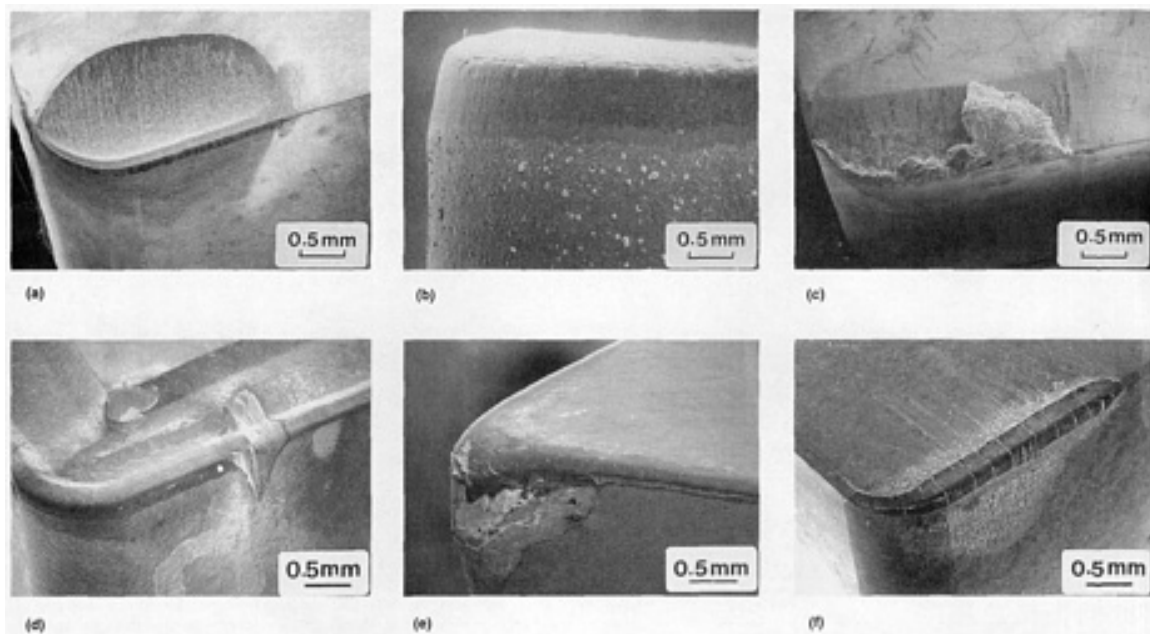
Tool wear mechanisms. (a) Crater wear on a cemented carbide tool produced during the machining of plain carbon steel. (b) Abrasive wear on the flank face of a cemented carbide tool produced during the machining of gray cast iron. (c) Builtup edge produced during low-speed machining of a nickel-base alloy. (d) Depth-of-cut notching on a carbide tool produced during the machining of a nickel-base superalloy. (e) Carbide insert showing nose wear (tool-tip blunting) due to insufficient deformation resistance of the tool. (f) Thermal and mechanical cracks in a carbide insert after interrupted cutting of low-alloy steel
